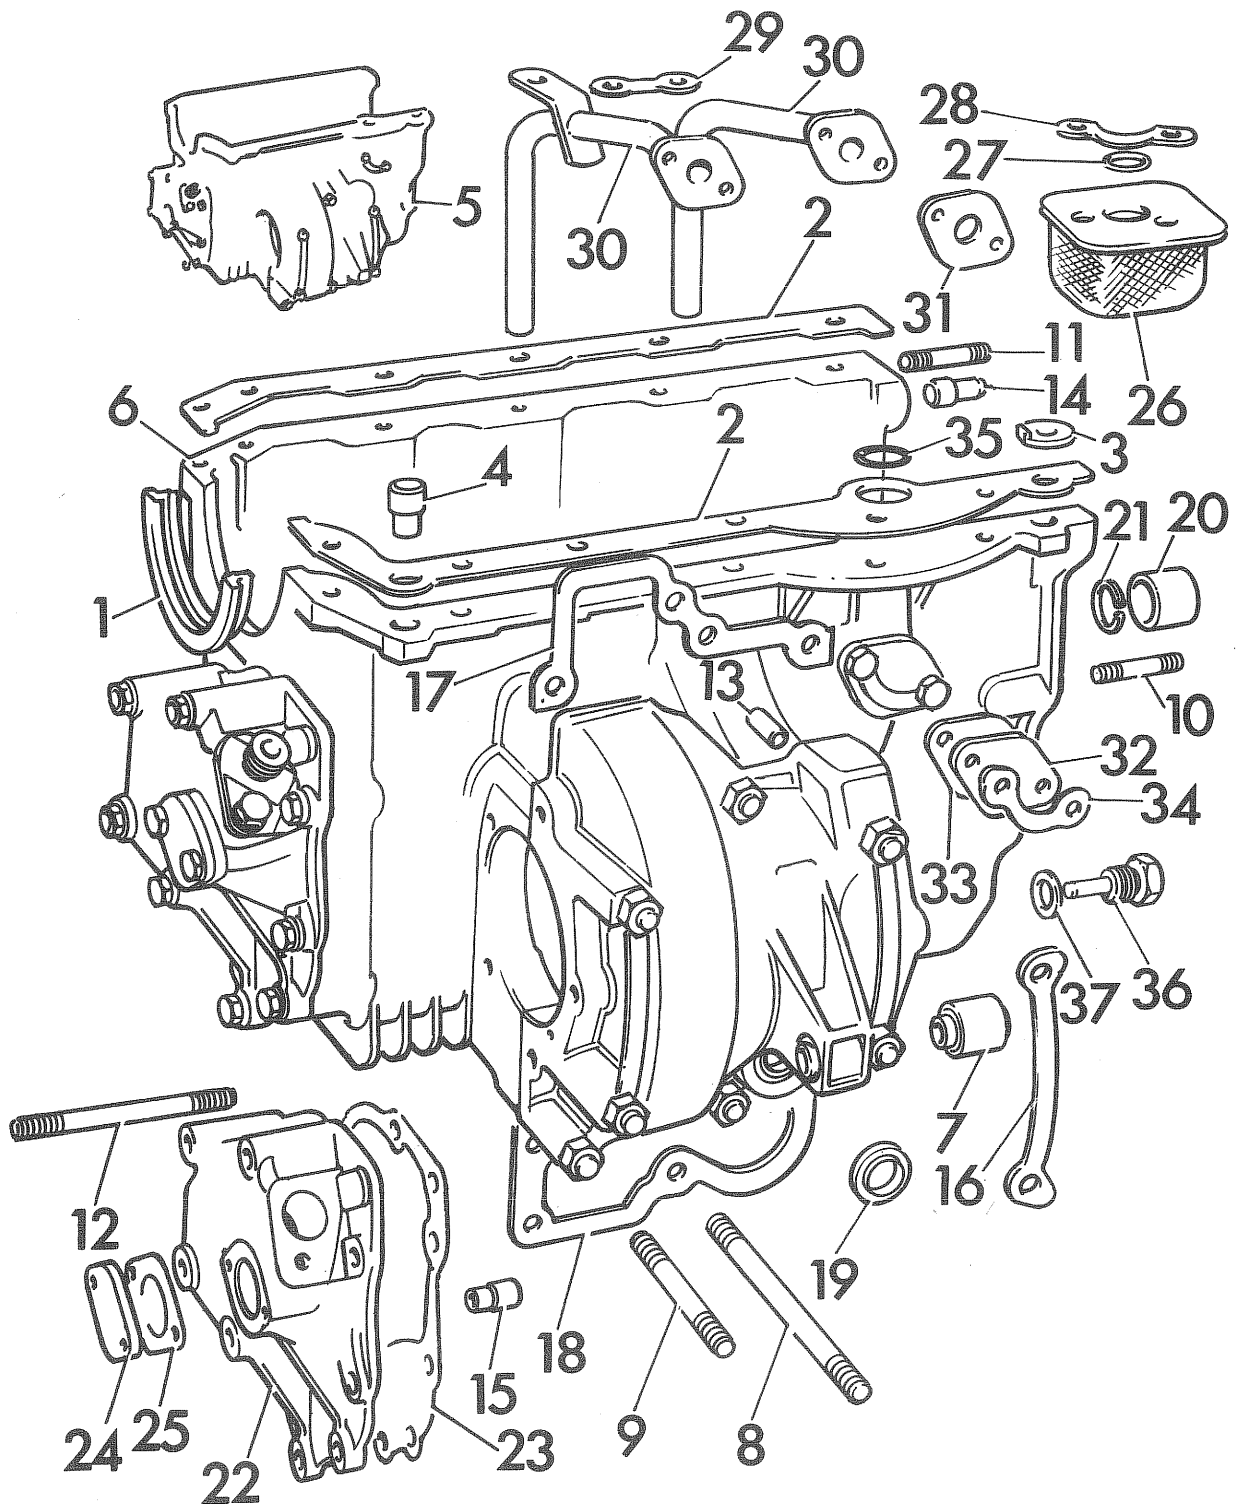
Exploded view of the rod-change type transmission casing (Sec 4)
